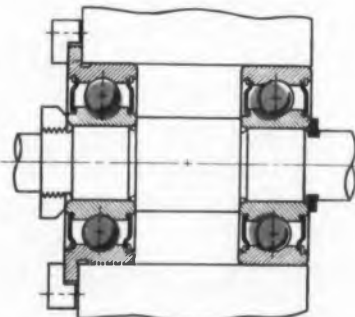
"Fixed and floating" mounting uses flanged bearing at one end, unflanged at other, permitting through-bored housing and avoiding machining of shoulder in housing.
